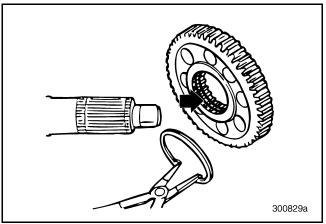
Removing Snap Ring from Inside Lo Gear (T313L/T318L Shown)
